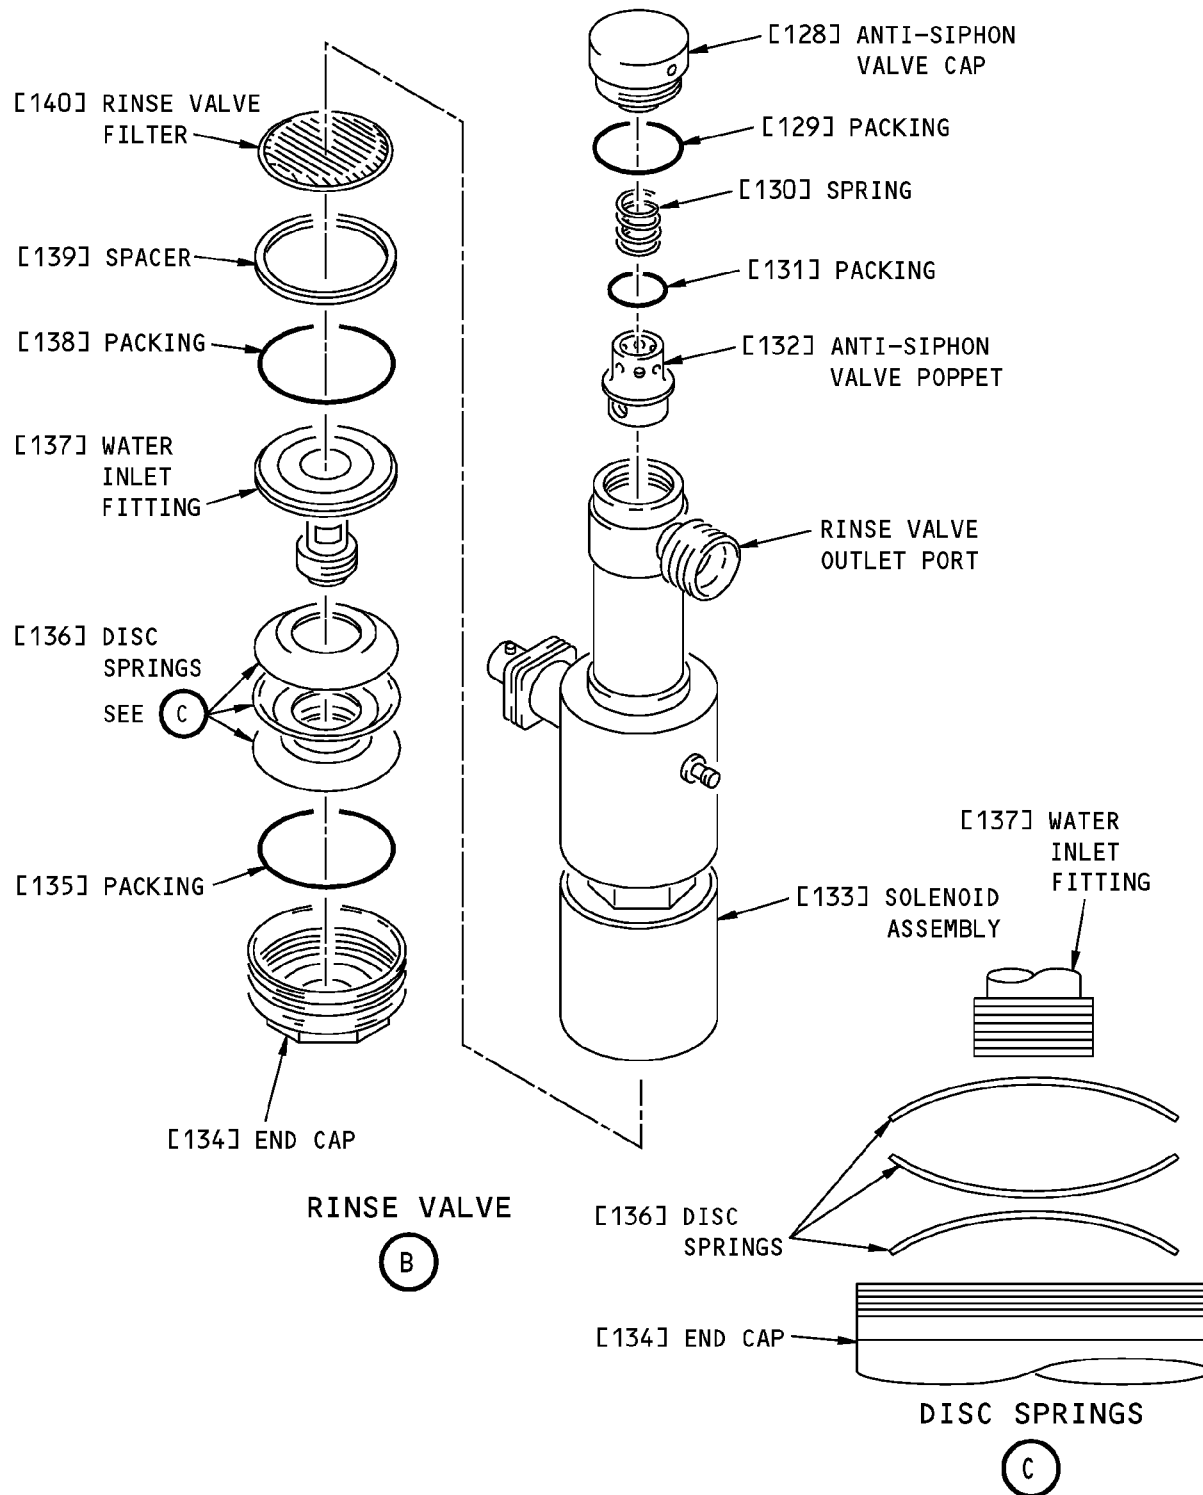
(Sheet 1 of 2)/38-32-01-990-820-002
